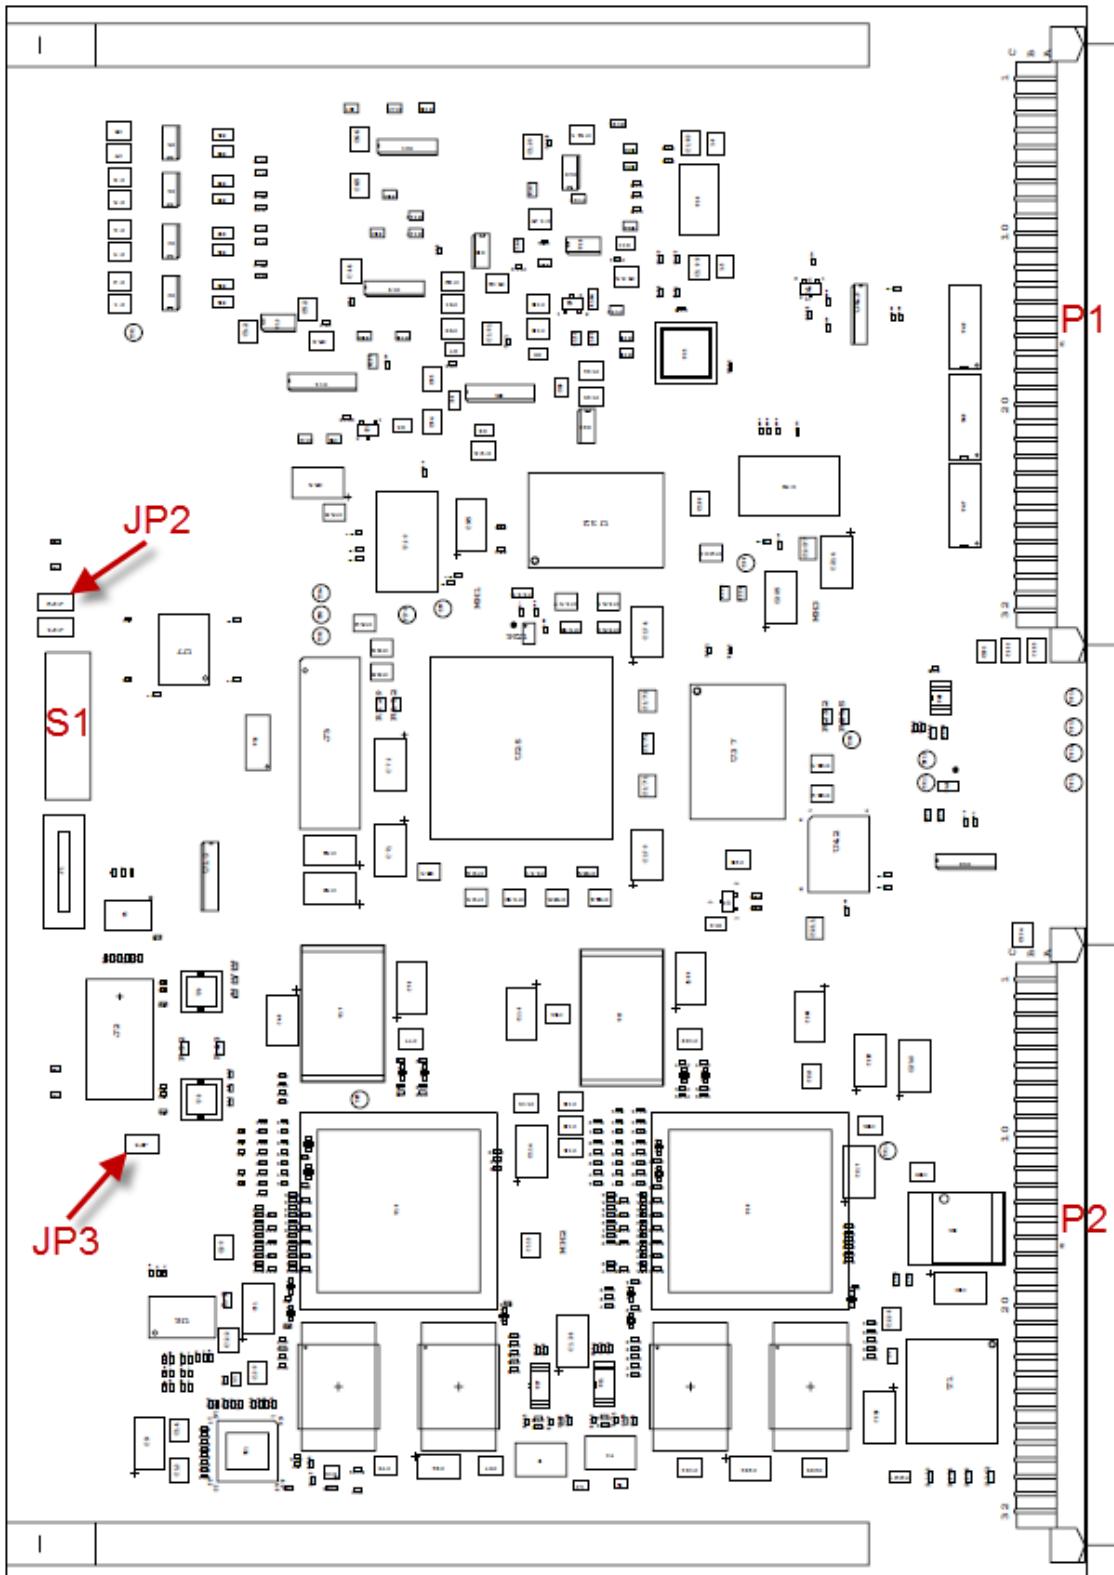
Model 7015/7016 VMEbus Tracker Board Top Assembly
